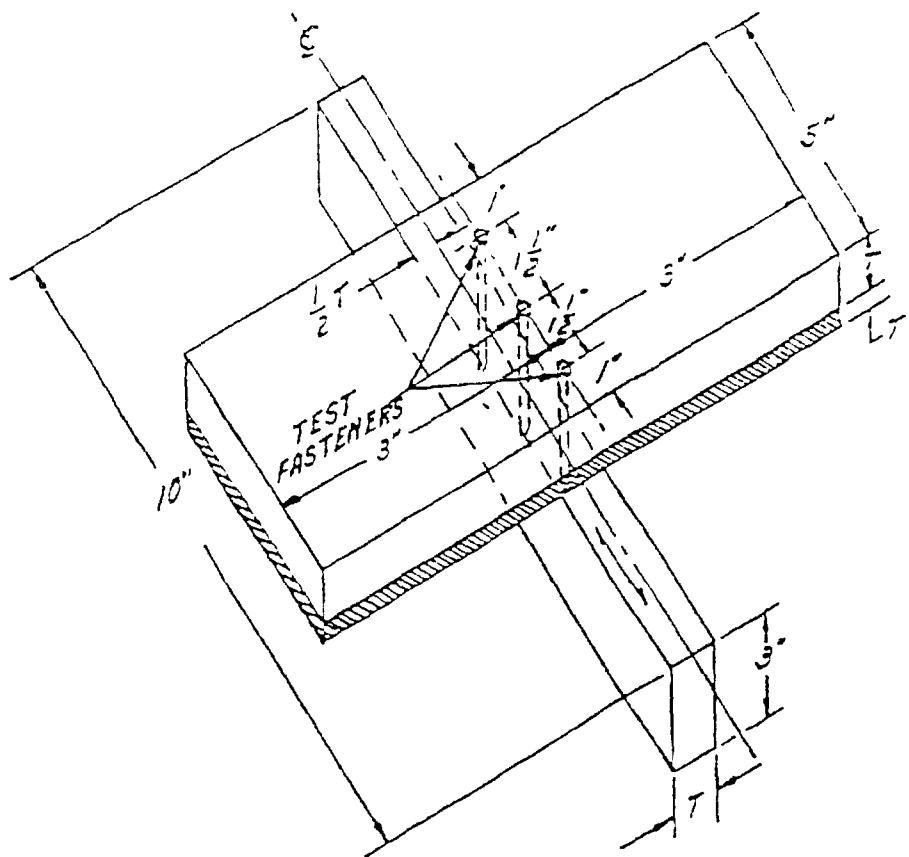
TEST SPECIMEN FOR DIRECT WITHDRAWAL RESISTANCE TEST (FOR CONTAINER ASSEMBLY)
